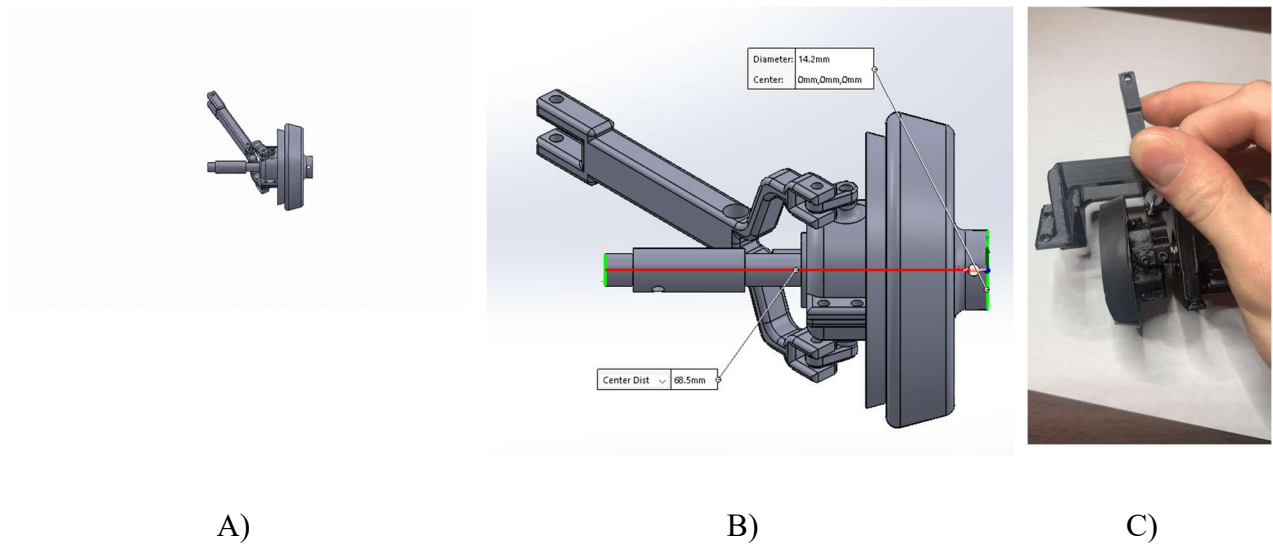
Final design of clutch A) exploded B) dimensioned and C) fabricated subsystem
